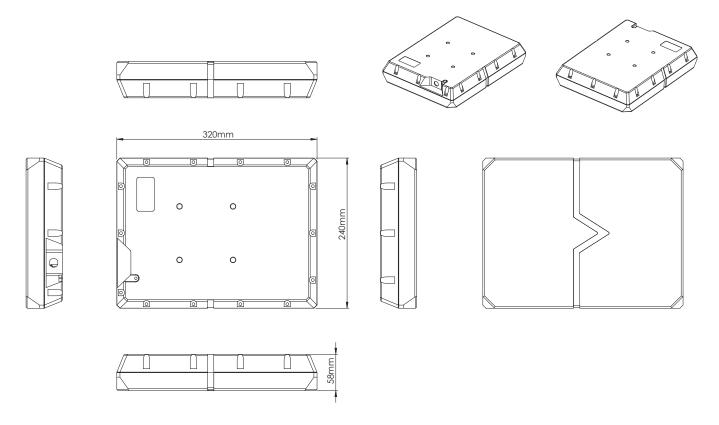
SR-1000 & SR-500-C radar sensor outline drawing
